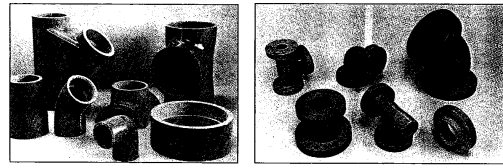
Compression molded fittings Figure 9-22 Flanged compression molded fittings
